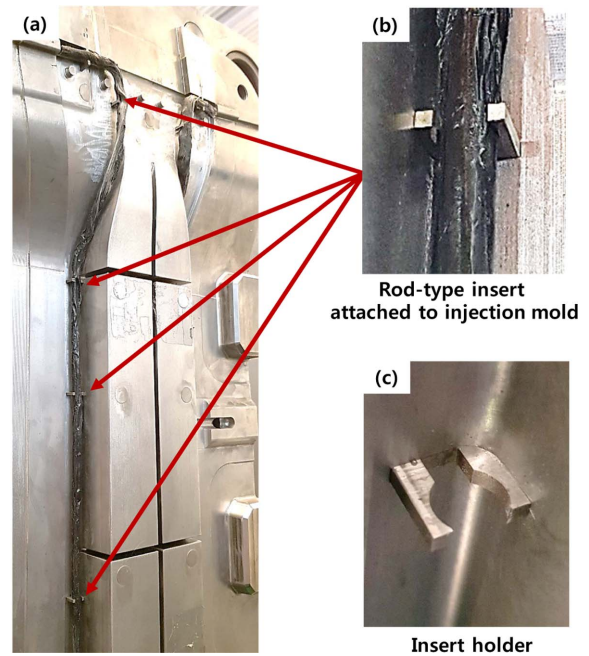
Injection mold: (a) Rod-type composite is inserted into the injection mold (b) rod-type insert attached to the injection mold using insert holder (c) insert holder
